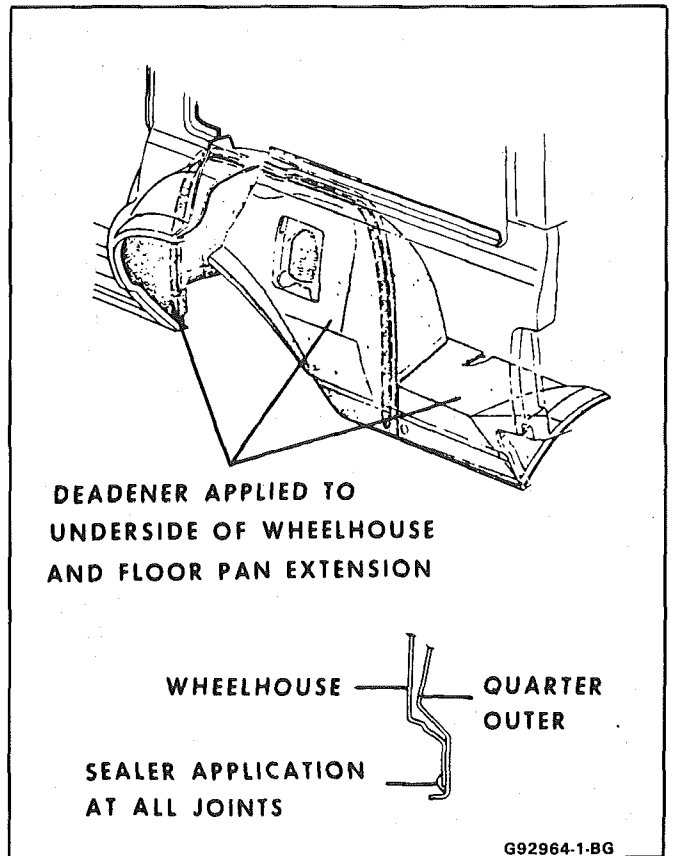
Typical Deadener and Sealer Application, Wheelhouse Area
